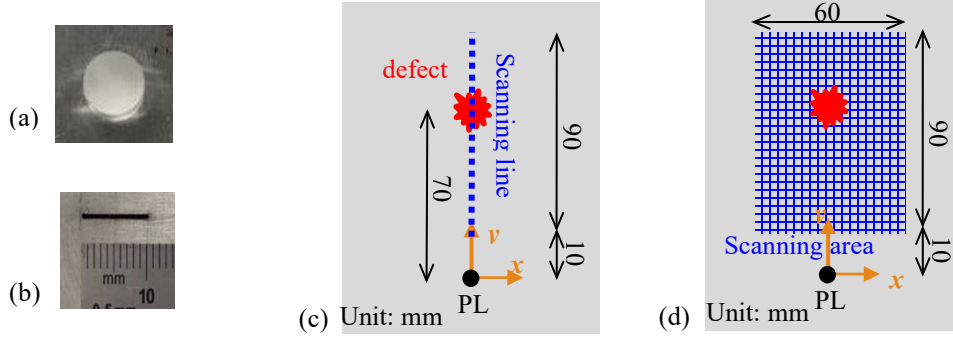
Schematic of specimen set up: (a) surface bonded quartz rod, (b) machine milled crack, (c) 1D line inspection set up, and (d) 2D area inspection setup
